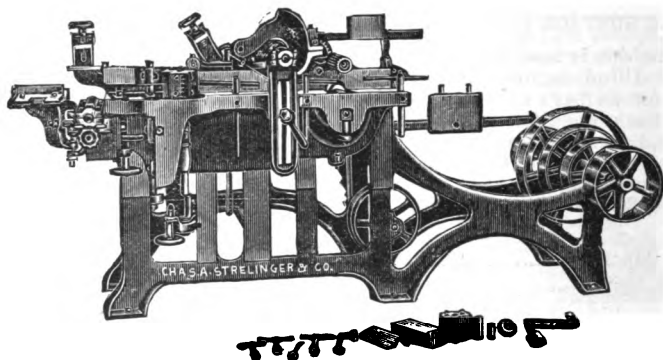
NO. 1-6 INCH FOUR-SIDED MOULDER.
